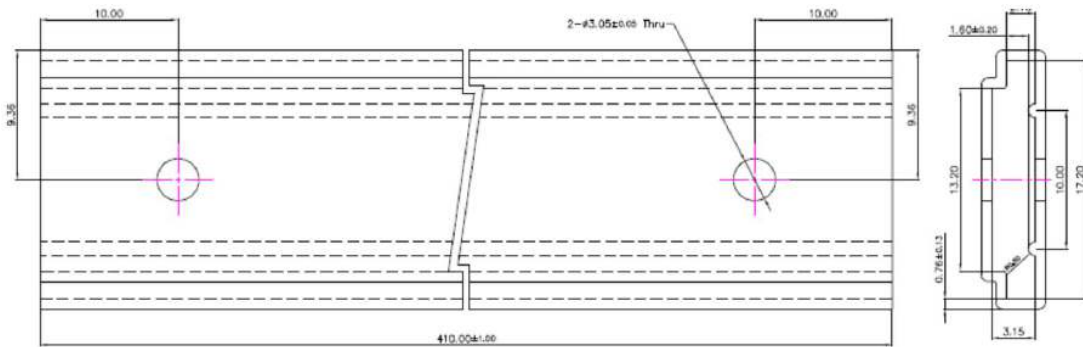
Tube dimensions for L2C5-xxxx1202X09Bx, L2C5-xxxx1203X09Bx.
